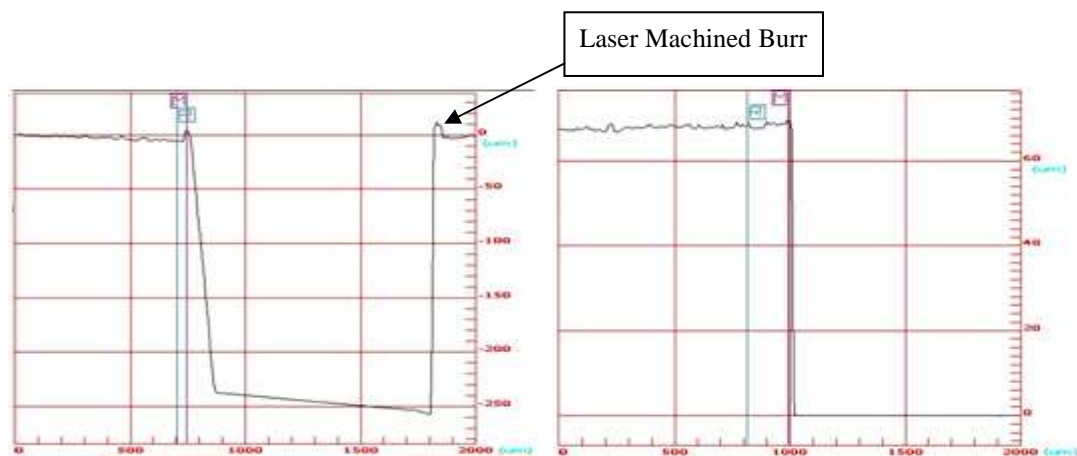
Laser machined burrs before (a) and after (b) flattening/annealing.
